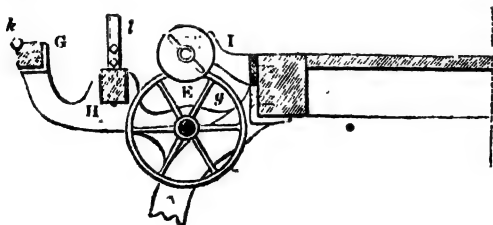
Bobbin Mechanism of the Silk Enging.
